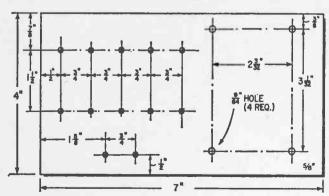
Front-panel layout is for a 4- by 7-inch sloping-front cabinet. The four 9/64-inch holes on the right must be marked and drilled accurately to mate with tapped spacers. Tubular-type spacers allow more sideplay but assembly becomes a bit more difficult.
